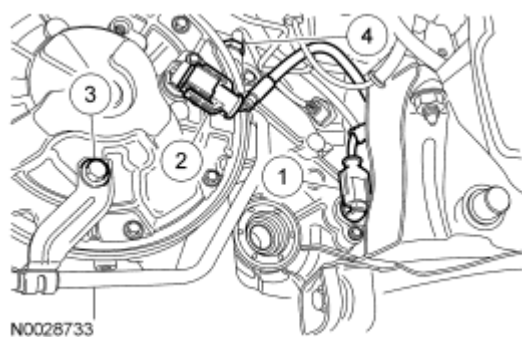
Fluid Cooler Tube, Electrical Connectors & Bracket
